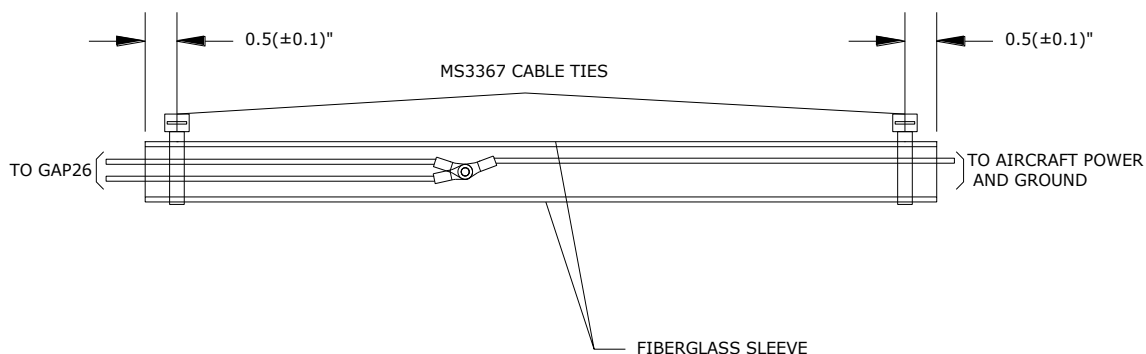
GAP 26 Mechanical Splice Detail (14-volt Aircraft with 10 AWG Wire)
